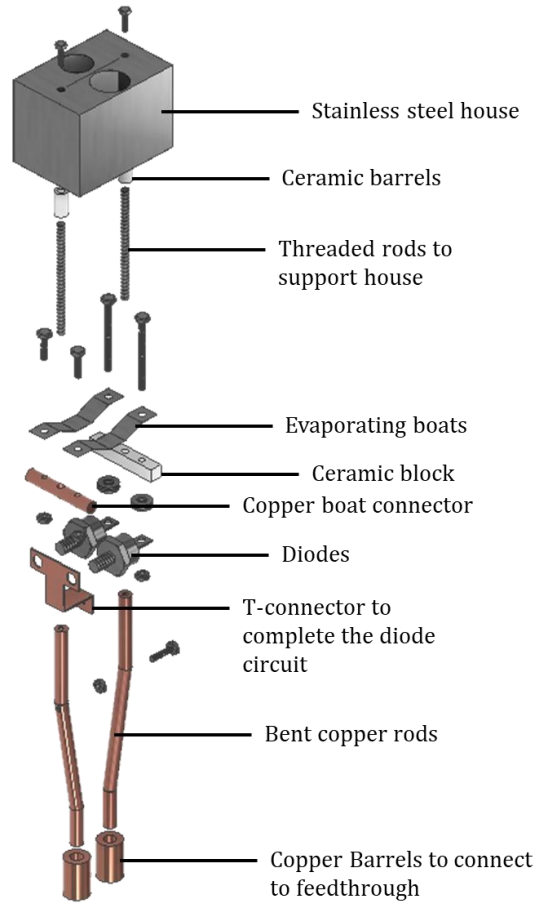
AutoCAD exploded view rendering of the evaporator. The barrels at the bottom secure the bent rods to a feedthrough (not pictured). The bent rods connect to long threaded rods and provide structure for the rest of the evaporator. The threaded rods secure both the horizontal copper rod and the ceramic block, and the house above. The copper rod and ceramic block are connected via two boats, and the ceramic block has thermal connection to a t-connector through two diodes.
